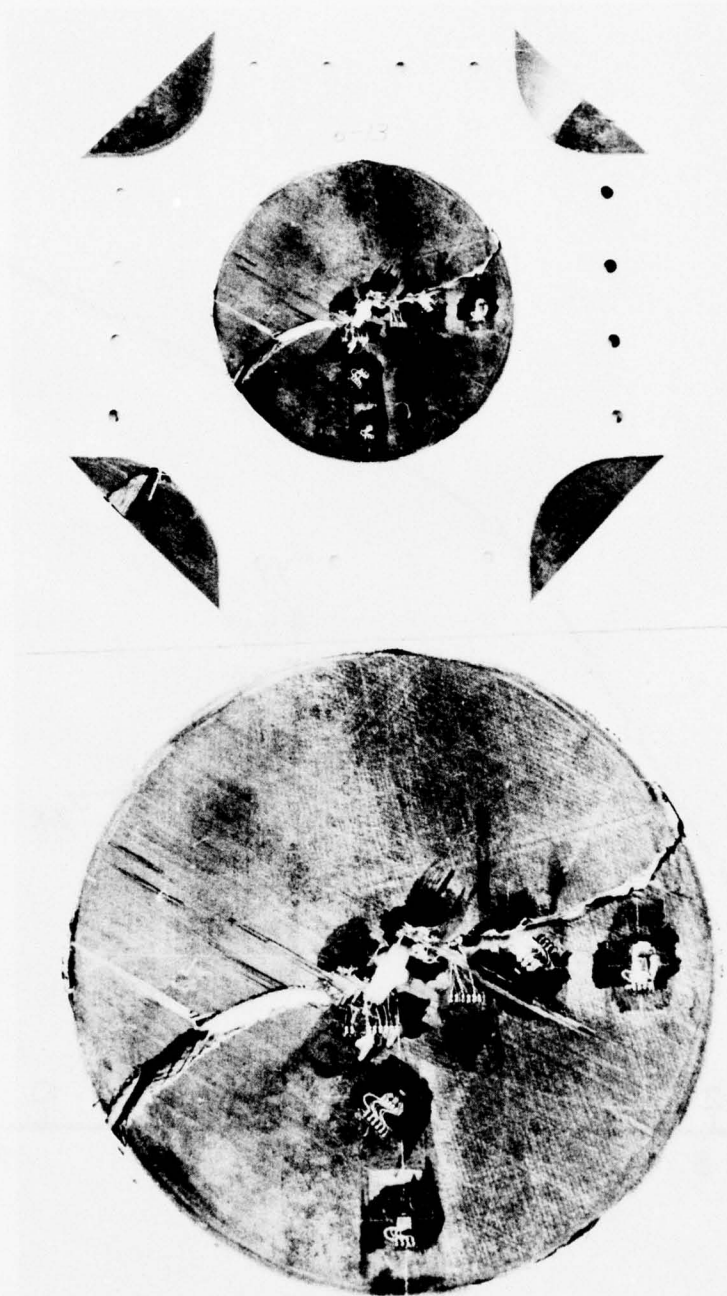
Biaxial Specimen with 1.91 cm (0.75 in.) Long Crack After Failure (Spec. No. 6-13).
